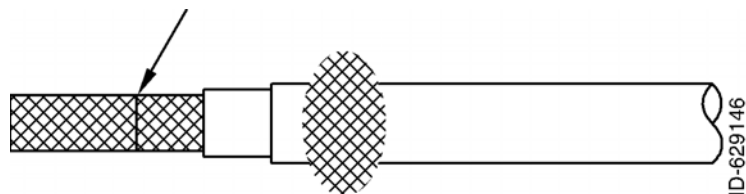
(Sheet 1 of 1) Quadraxial Cable Preparation
